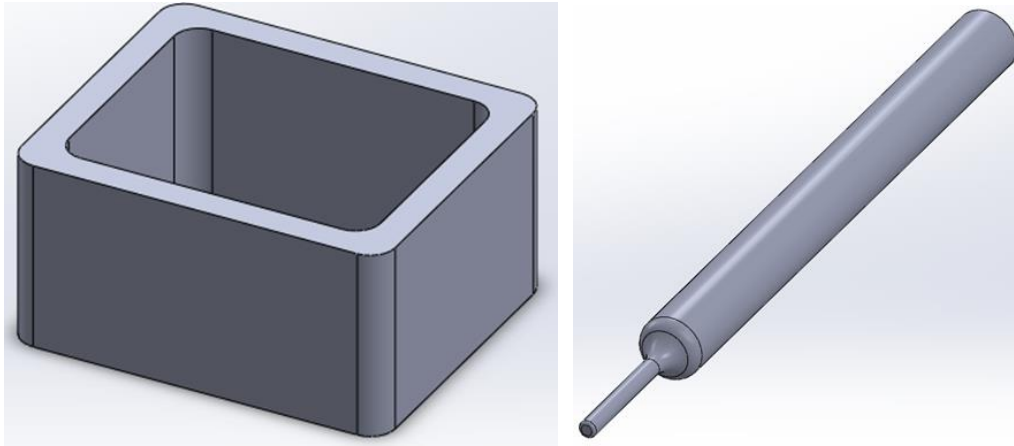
Rectangular steel tube support (left) and hard steel punch (right)
